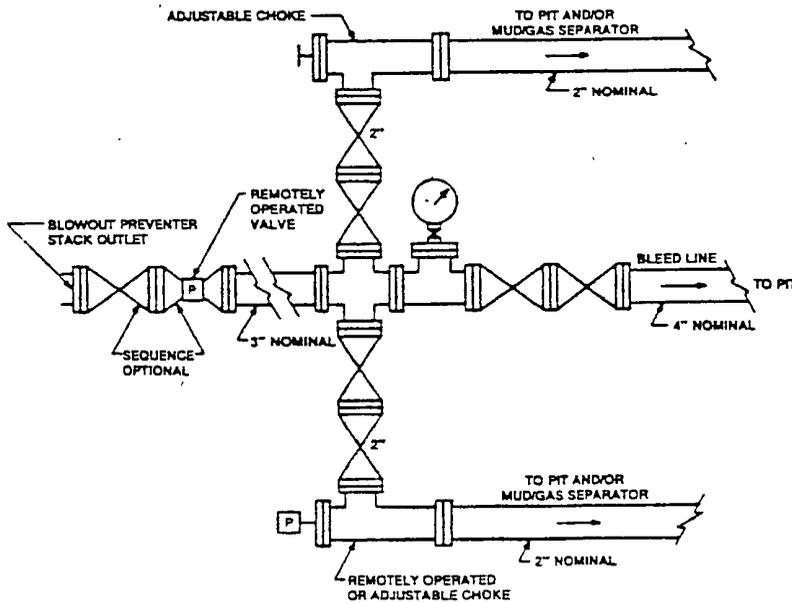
Typical choke manifold assembly for 5M rated working pressure service — surface installation.
